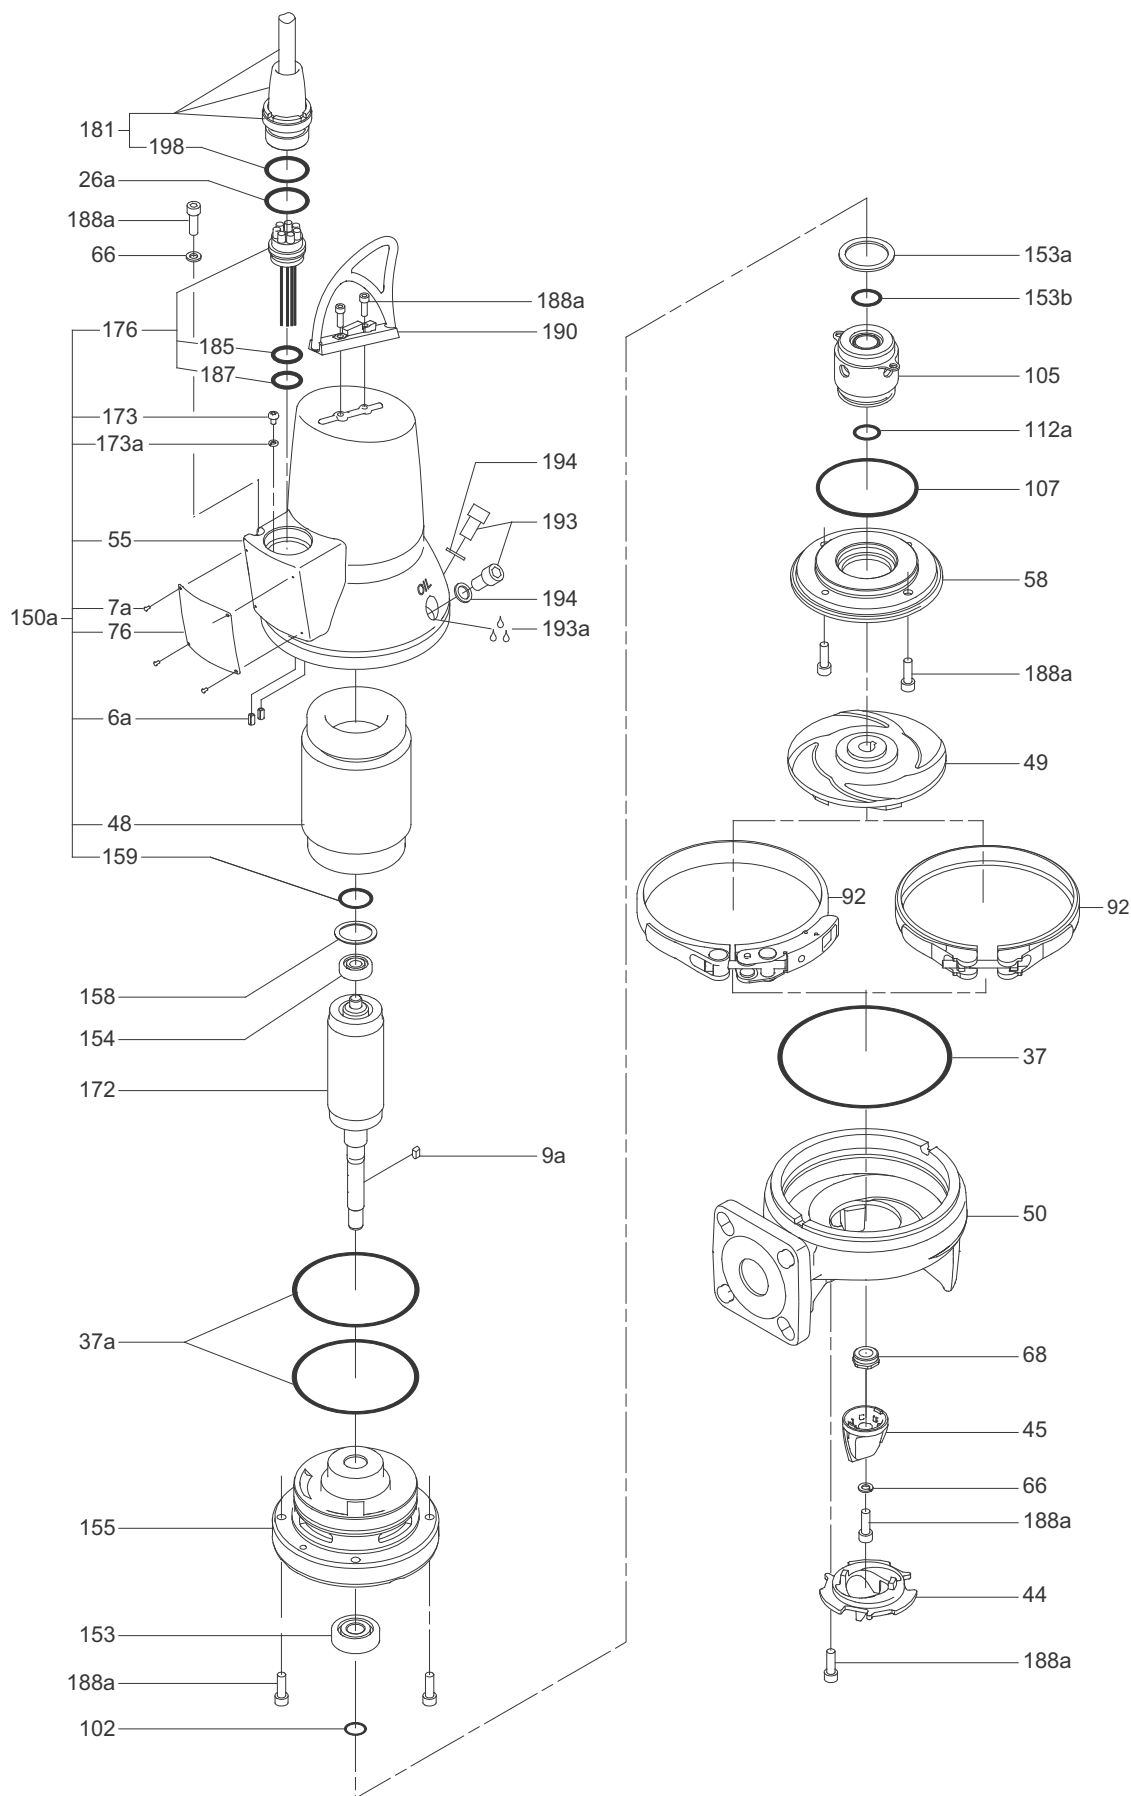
Exploded view of SEG pumps, 2.6, 3.1 and 4.0 kW
